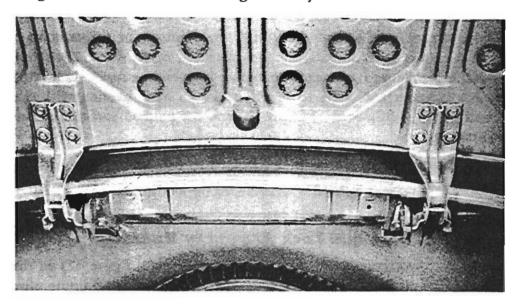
Slotted Holes for Trunk Lid Hinge Screws Provide for Lid Adjustment.
